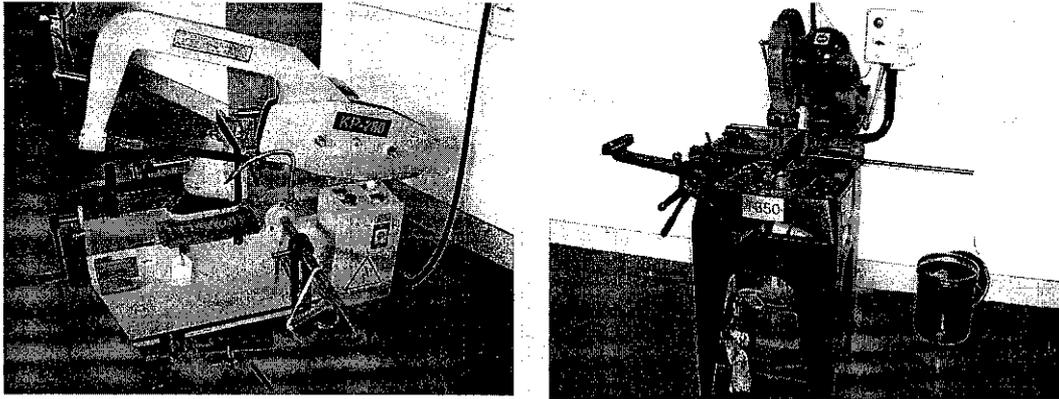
and 3.6 : Linear Hacksaw machine (on the left) is used to produce 6 major pieces from STAR brake pad. And rotating hacksaw is used to produce 3 major pieces from PUTRA brake pad.
